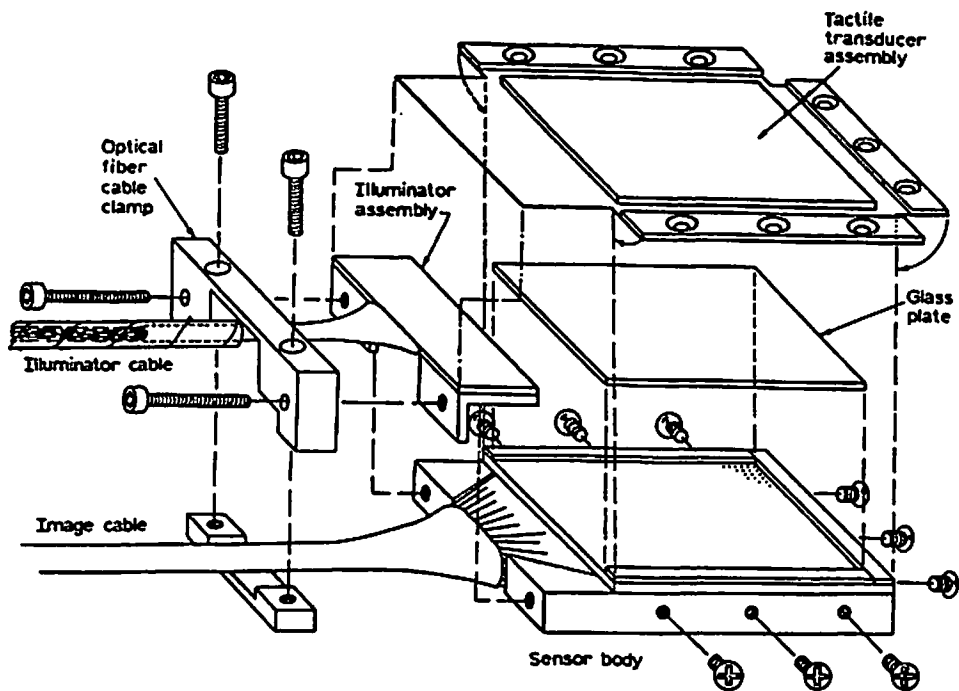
Exploded assembly drawing of the TSA head showing the primary components.
